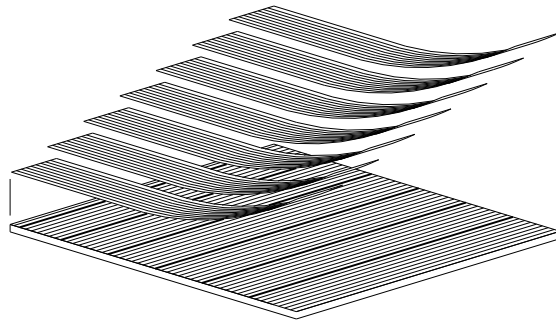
The second step in hand-lamination of HPPC sheets, spot welding of 0° continuous fibre reinforced tapes over the top of the 90° ply.
